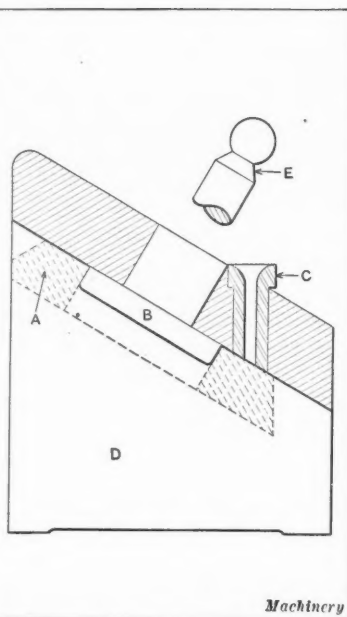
Jig for drilling Angular Hole in Fuse Ring
